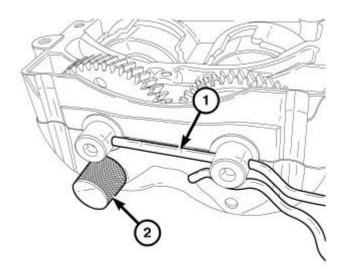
Balance Shaft Housing Courtesy of CHRYSLER LLC
